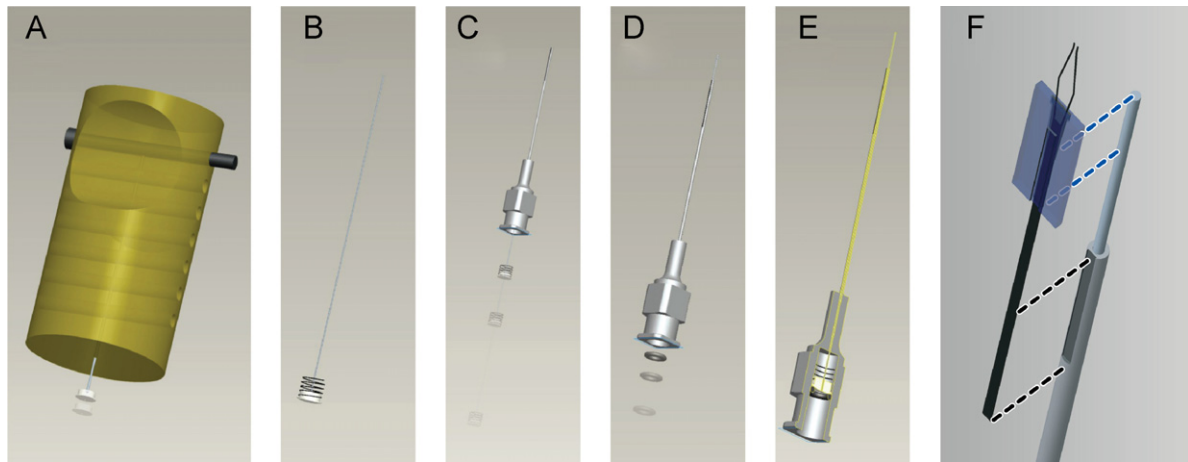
Assembly process for the luer needle package and for attaching the assembled MEMS microtweezer microtool to the assembled package. The body of the microtweezer is placed in a notch at the end of the luer needle and glued, and the protruding end of the cable is glued to the notch on the underside of the box.
